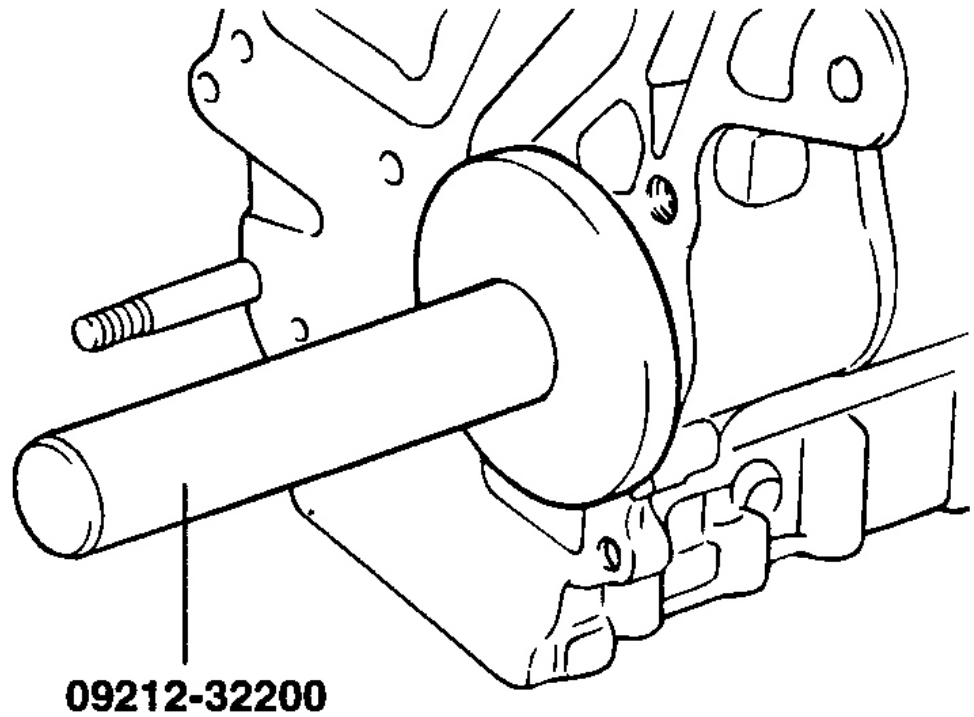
Installing Rear Bearing Of Left Counter Balance Shaft To Cylinder Block
